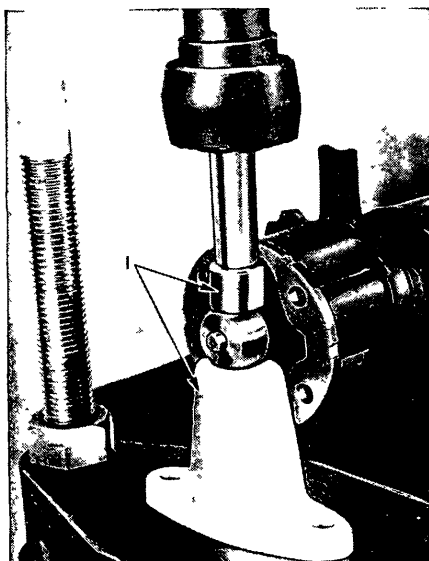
Showing jig and locating bushing for installing trunnion pin in Detroit Ball & Trunnion Joint
